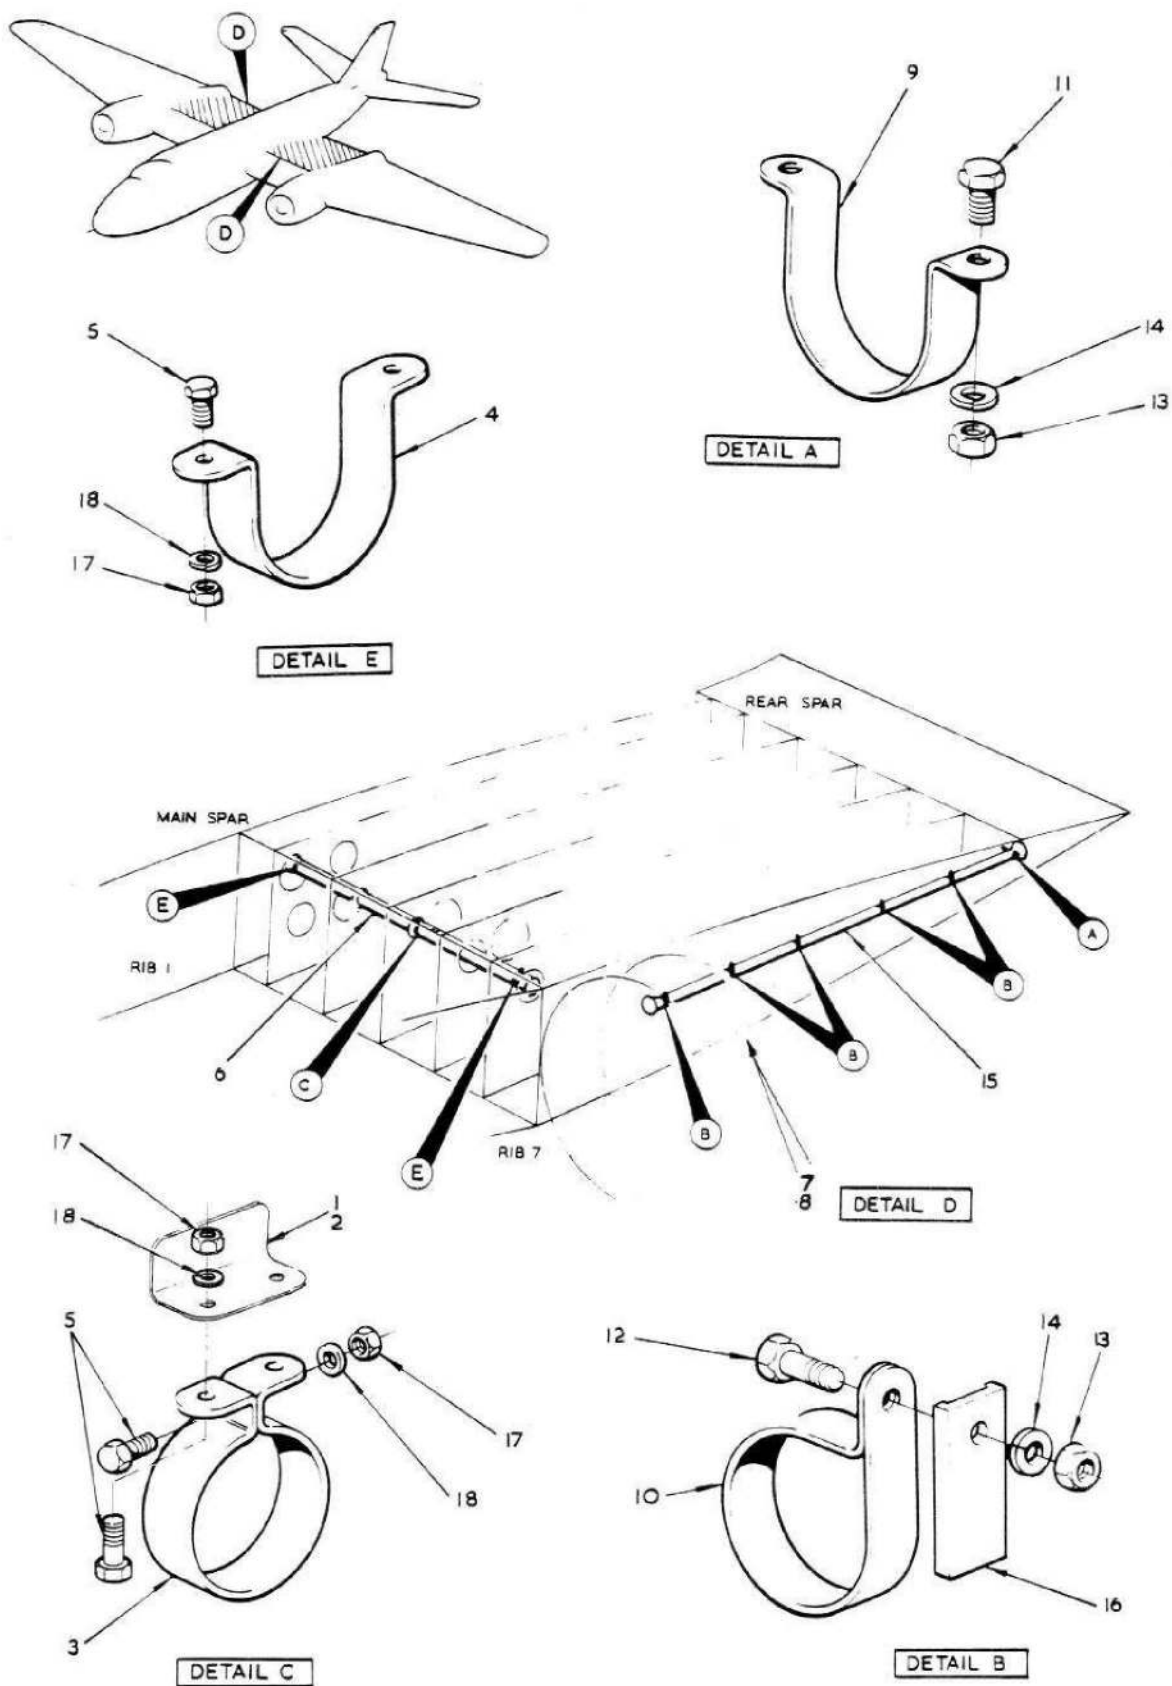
ELECTRICAL EQUIPMENT IN WINGS
